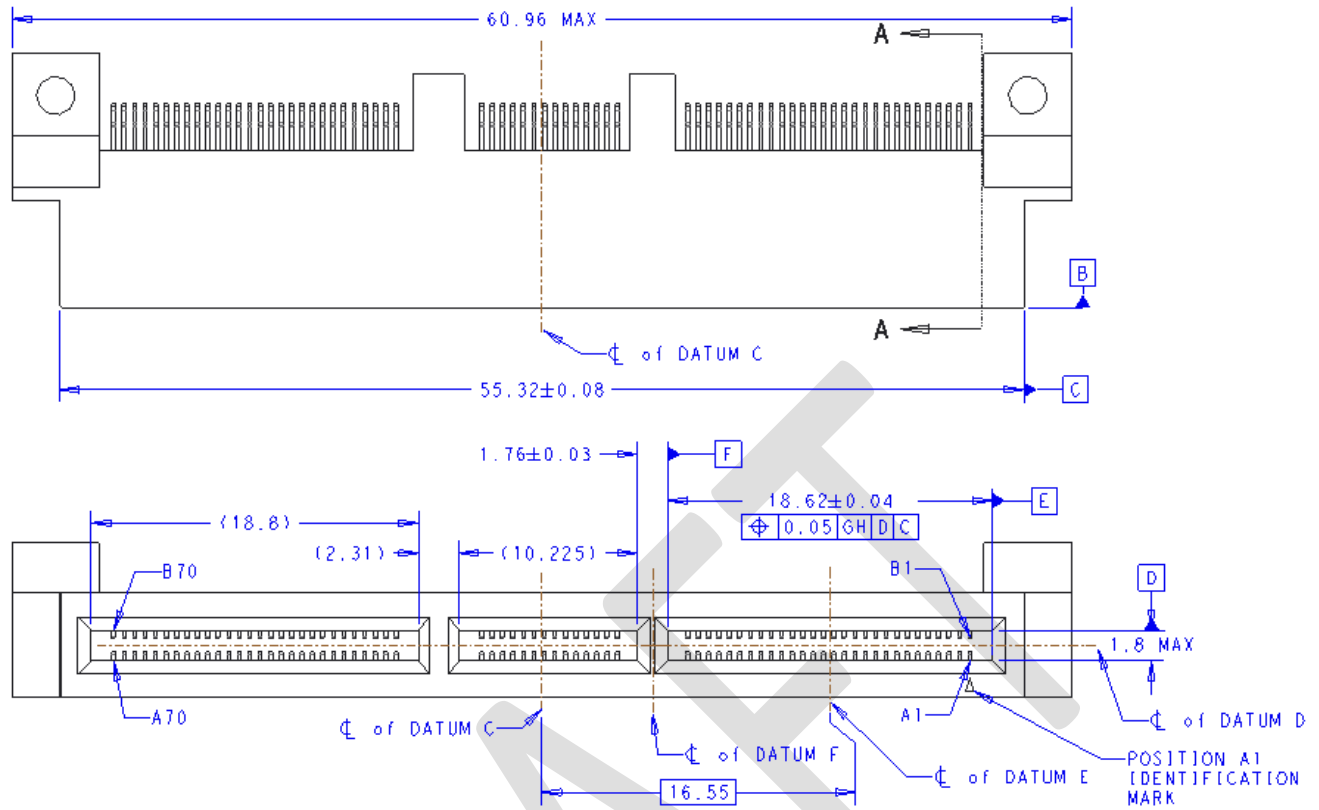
4C STRADDLE MOUNT CONNECTOR DIMENSIONS – FRONT VIEW (MM)
